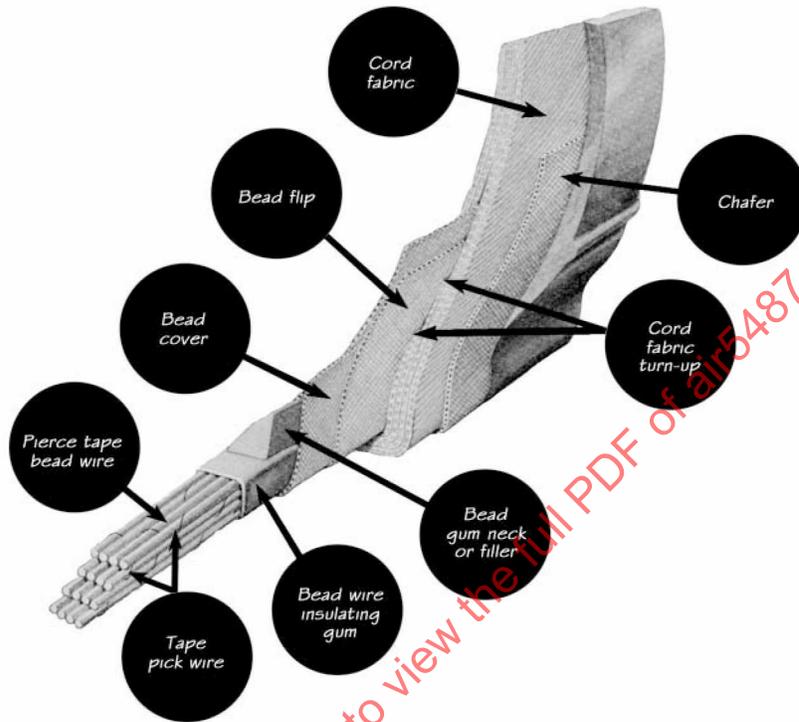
The straight-side tire has nonstretchable beads containing wire which holds beads tightly against rim. Fabric flap protects tube from damage.
